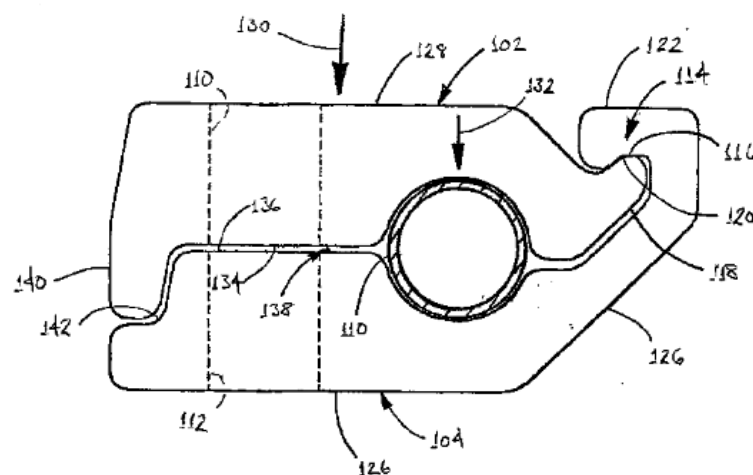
US2001051072A1 Hydraulic line mounting clamp by Eckart & Keddie (2001)
